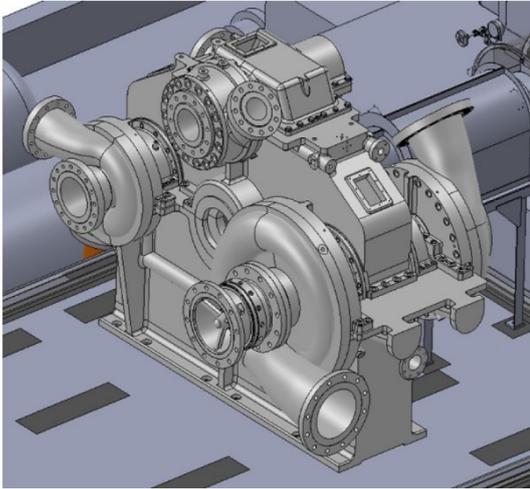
Multi-shaft, multi-stage centrifugal compressor with built-in speed-increasing gear
